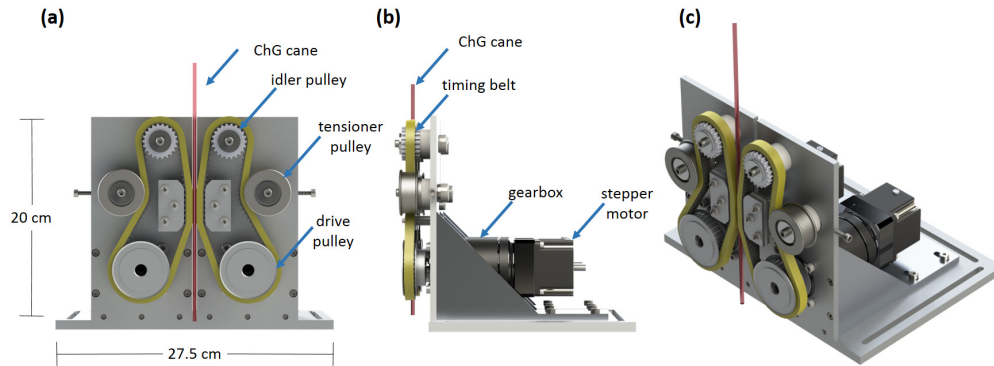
(a) Front view, (b) side view, and (c) 3D view of the cane puller used to maintain constant cane diameter and straightness during drawing from the double-crucible furnace. The system consists of two synchronized stepper motors, a gearhead to achieve torque and speed requirements, in addition to soft belts which grab the cane and pull it on it at a very low speed of $\approx 0.5 - 1$ cm/min.
